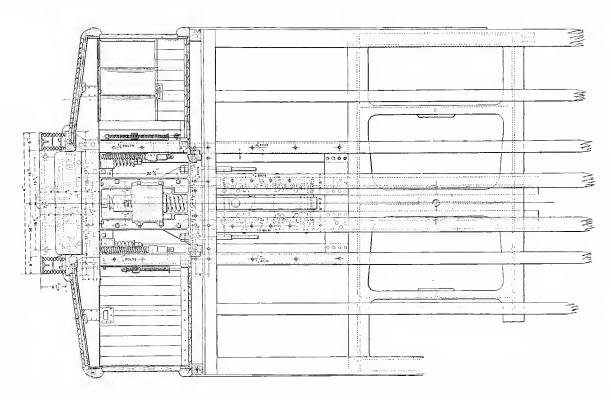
Plan of Gould Wide Vestibule Steel Platform, with Friction Buffer and Draft Gear. Gould Coupler Company.
